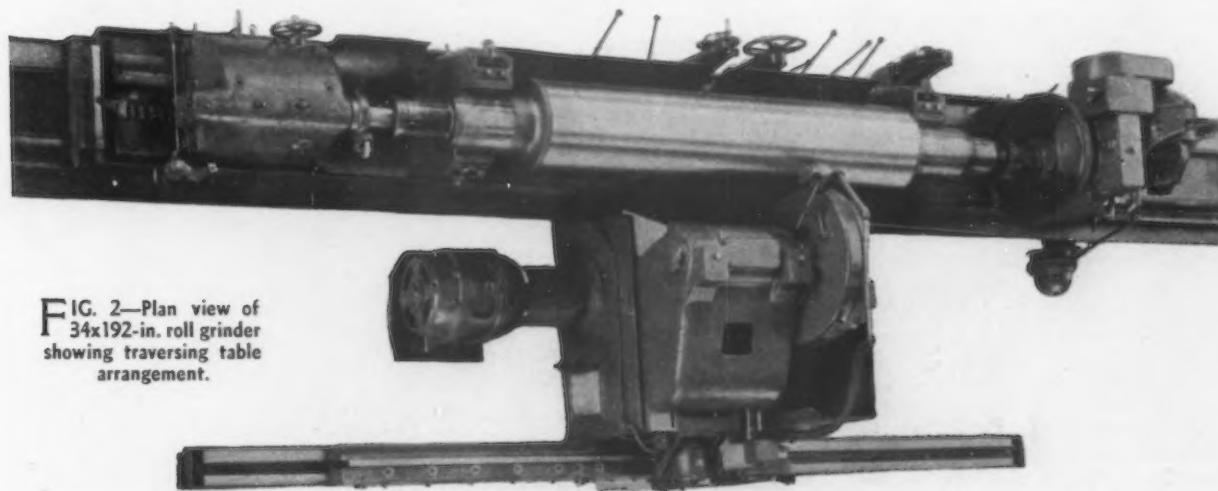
Plan view of 34x192-in. roll grinder showing traversing table arrangement.
